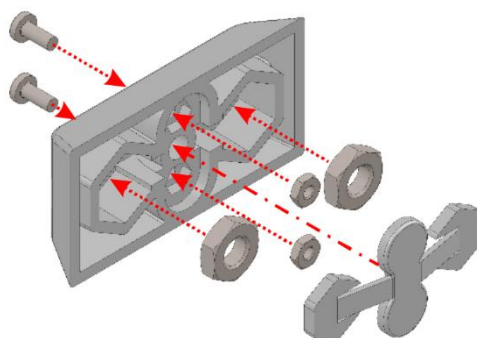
Assembly of the Attachment Mechanism components installed in ITSCAM 400
